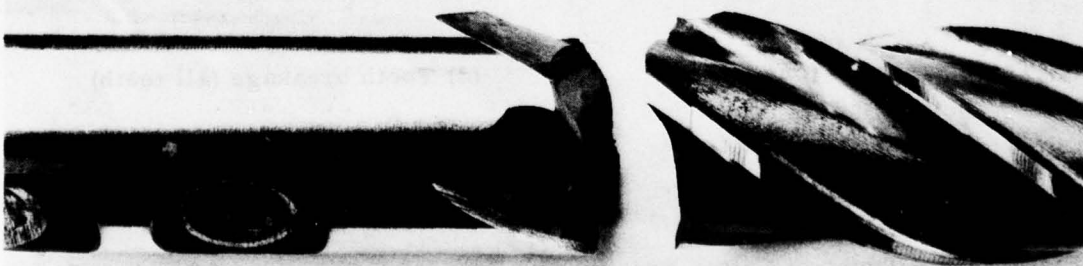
Types of Cutter Breakages: Excessive Chipping of Teeth and Tooth Breakage, 1 in. Diameter Cutters
